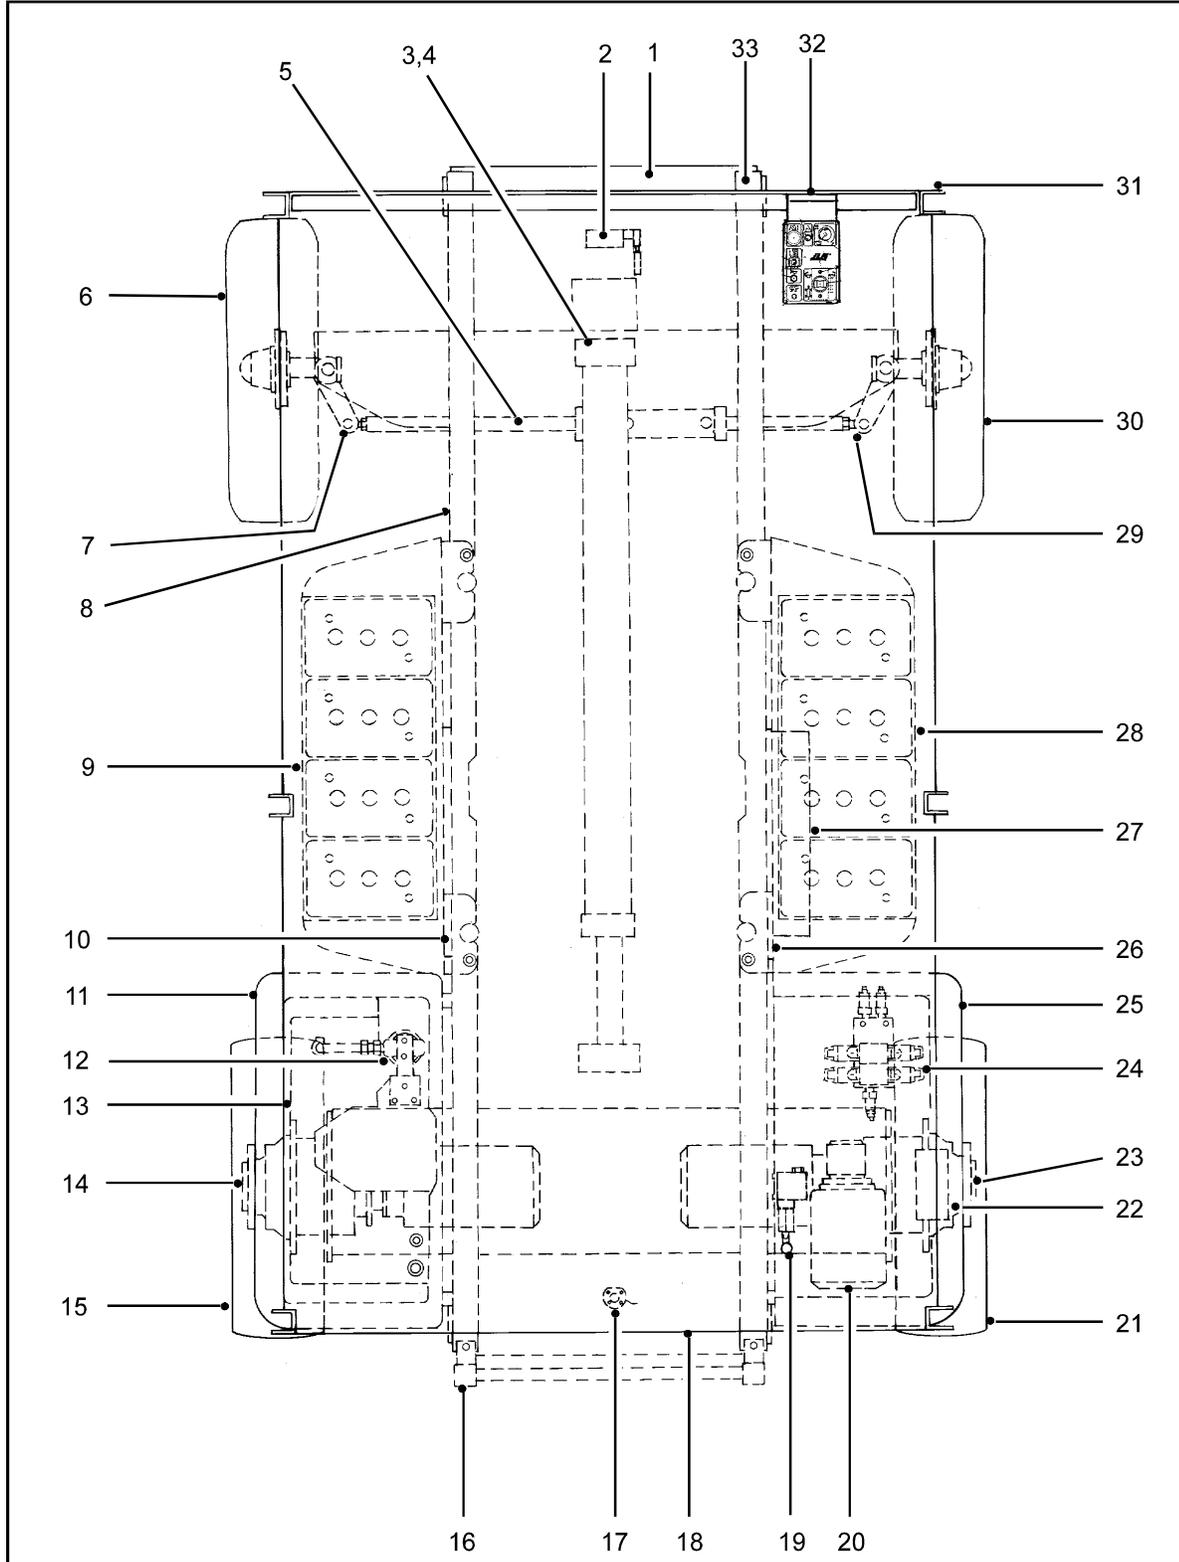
Daily Walk-Around Inspection (Sheet 1 of 3)
